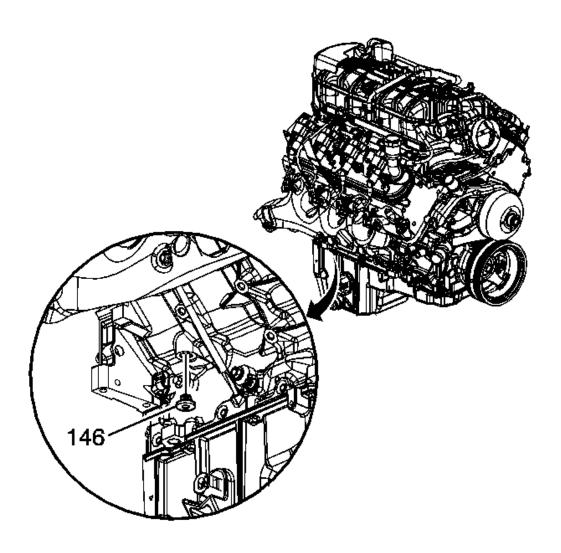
View Of Engine Block Coolant Drain Hole Plug Courtesy of GENERAL MOTORS CORP.
